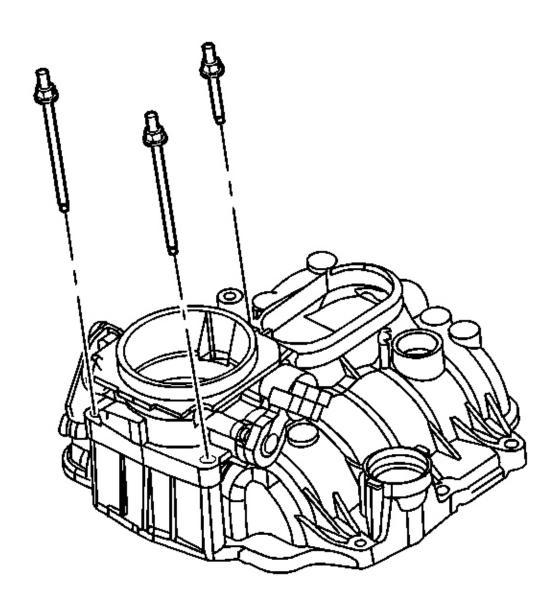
View Of Throttle Body & Attaching Studs Courtesy of GENERAL MOTORS CORP.
